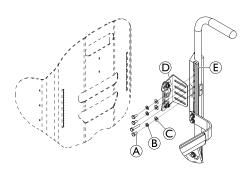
Elite 2 Back (shown with backrest plate removed for better view)
